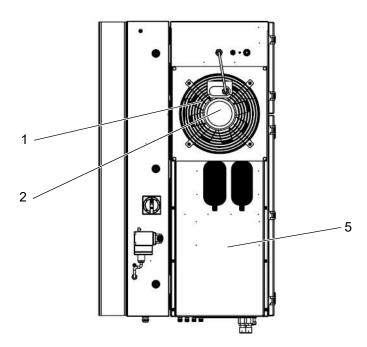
Heatpipe, outside view with mounted upper venilator (Example)
